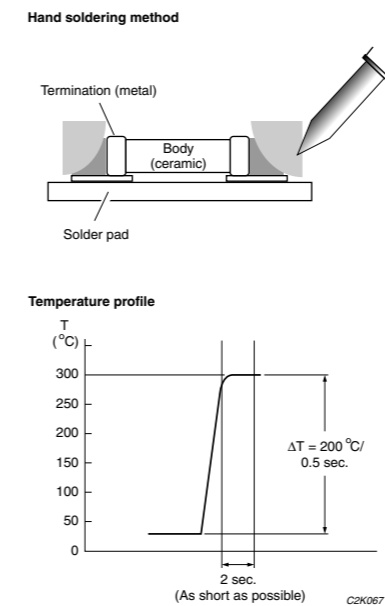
Hand-soldering method and profile, recommended conditions: 300°C for 5 seconds
